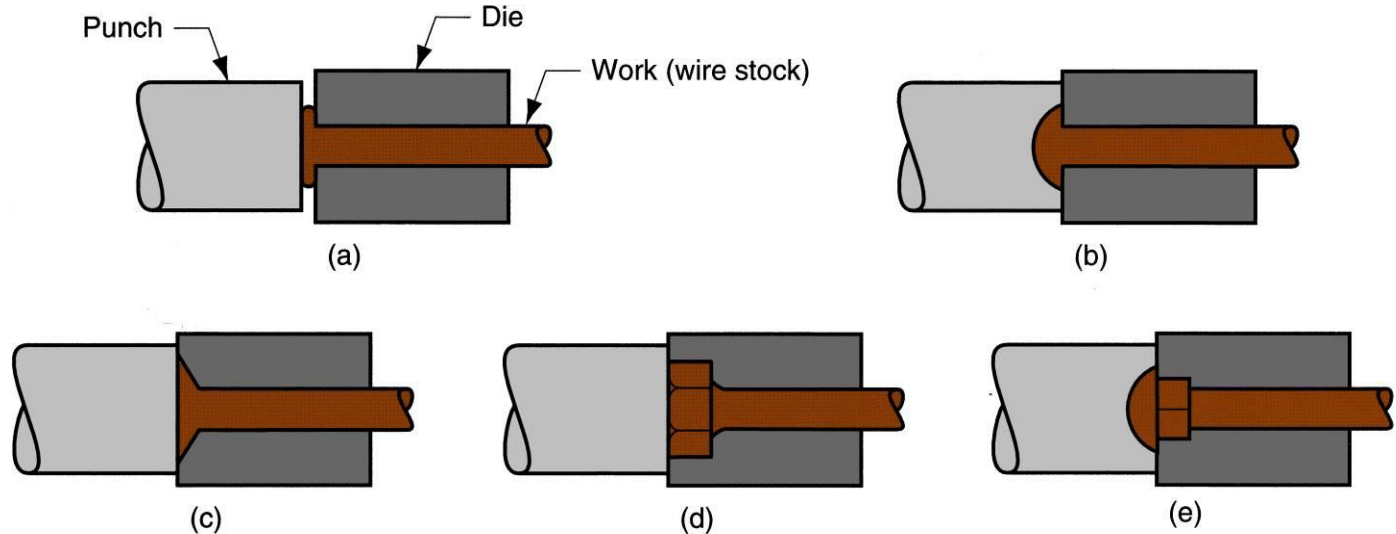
Examples of heading (upset forging) operations: (a) heading a nail using open dies, (b) round head formed by punch, (c) and (d) two common head styles for screws formed by die, (e) carriage bolt head formed by punch and die.
